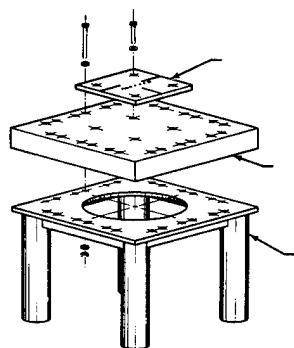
Test Fixture Used for Baseplate Tests 2A.1–2A.12.
